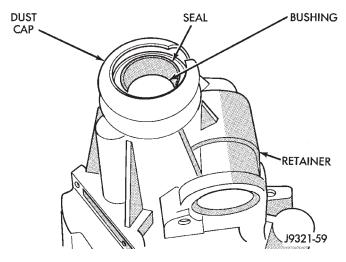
Rear Retainer Cap, Bushing And Seal Position
